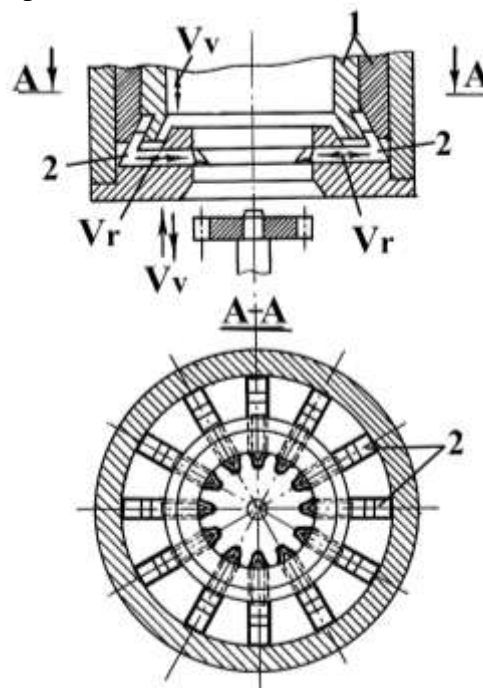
Gear cutting by multiple tool slotting head: 1-gear; 2-radially arranged tools
